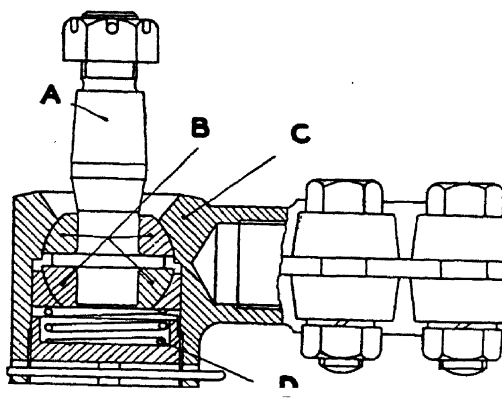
Section Through Ball Joint, showing how the Four Phenolic Moulded Segments are applied and preloaded (A) Steel Pin ; (B) Four Bakelite Segments Forming Ball ; (C) Steel Housing with Chrome-Plated Interior (D) Cover Plate
